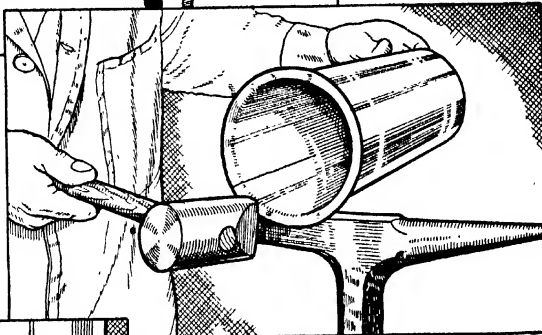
(left).—FORMING FLANGE — FINAL OPERATION
